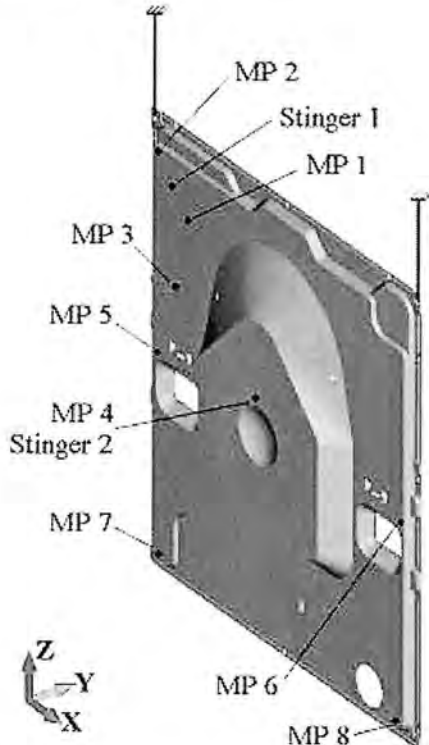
Accelerometer, stinger and suspension positions pointed out on the Back plate.
